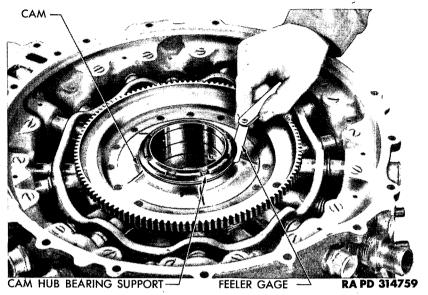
Measuring End Play of Cam Using Gage 41-G-400
